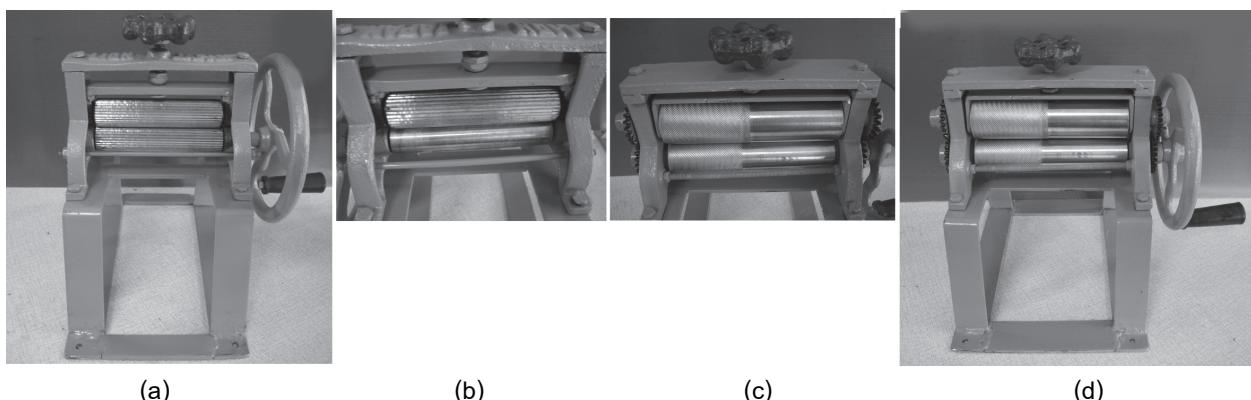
Modification of rubber calender process; (a) dried squid calender, (b) distance adjustable rollers, (c) driving and driven gears (d) rubber calendar shafts
